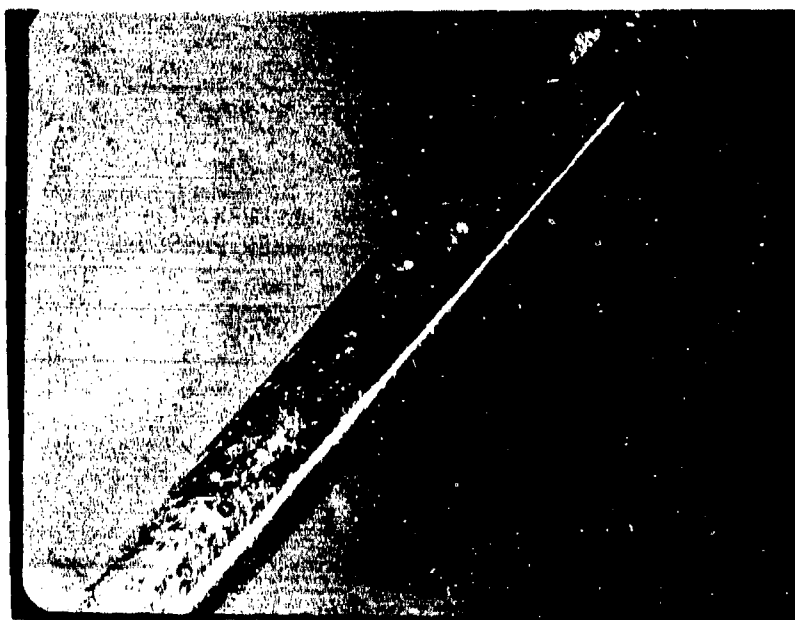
Resistor lead consisting of solder over copper exhibiting acceptable solderability after 1 hour steam aging.
